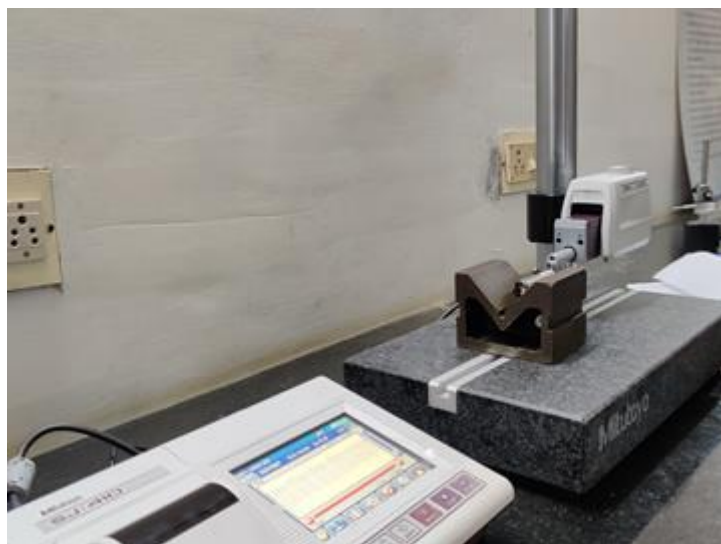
Mitutoyo SJ-410 Surface roughness testing machine.
